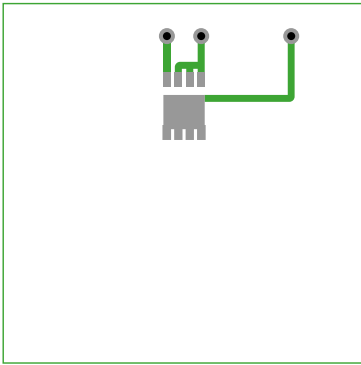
PCB layout for thermal resistance junction to ambient minimum footprint; FR4 Board; 2oz copper
